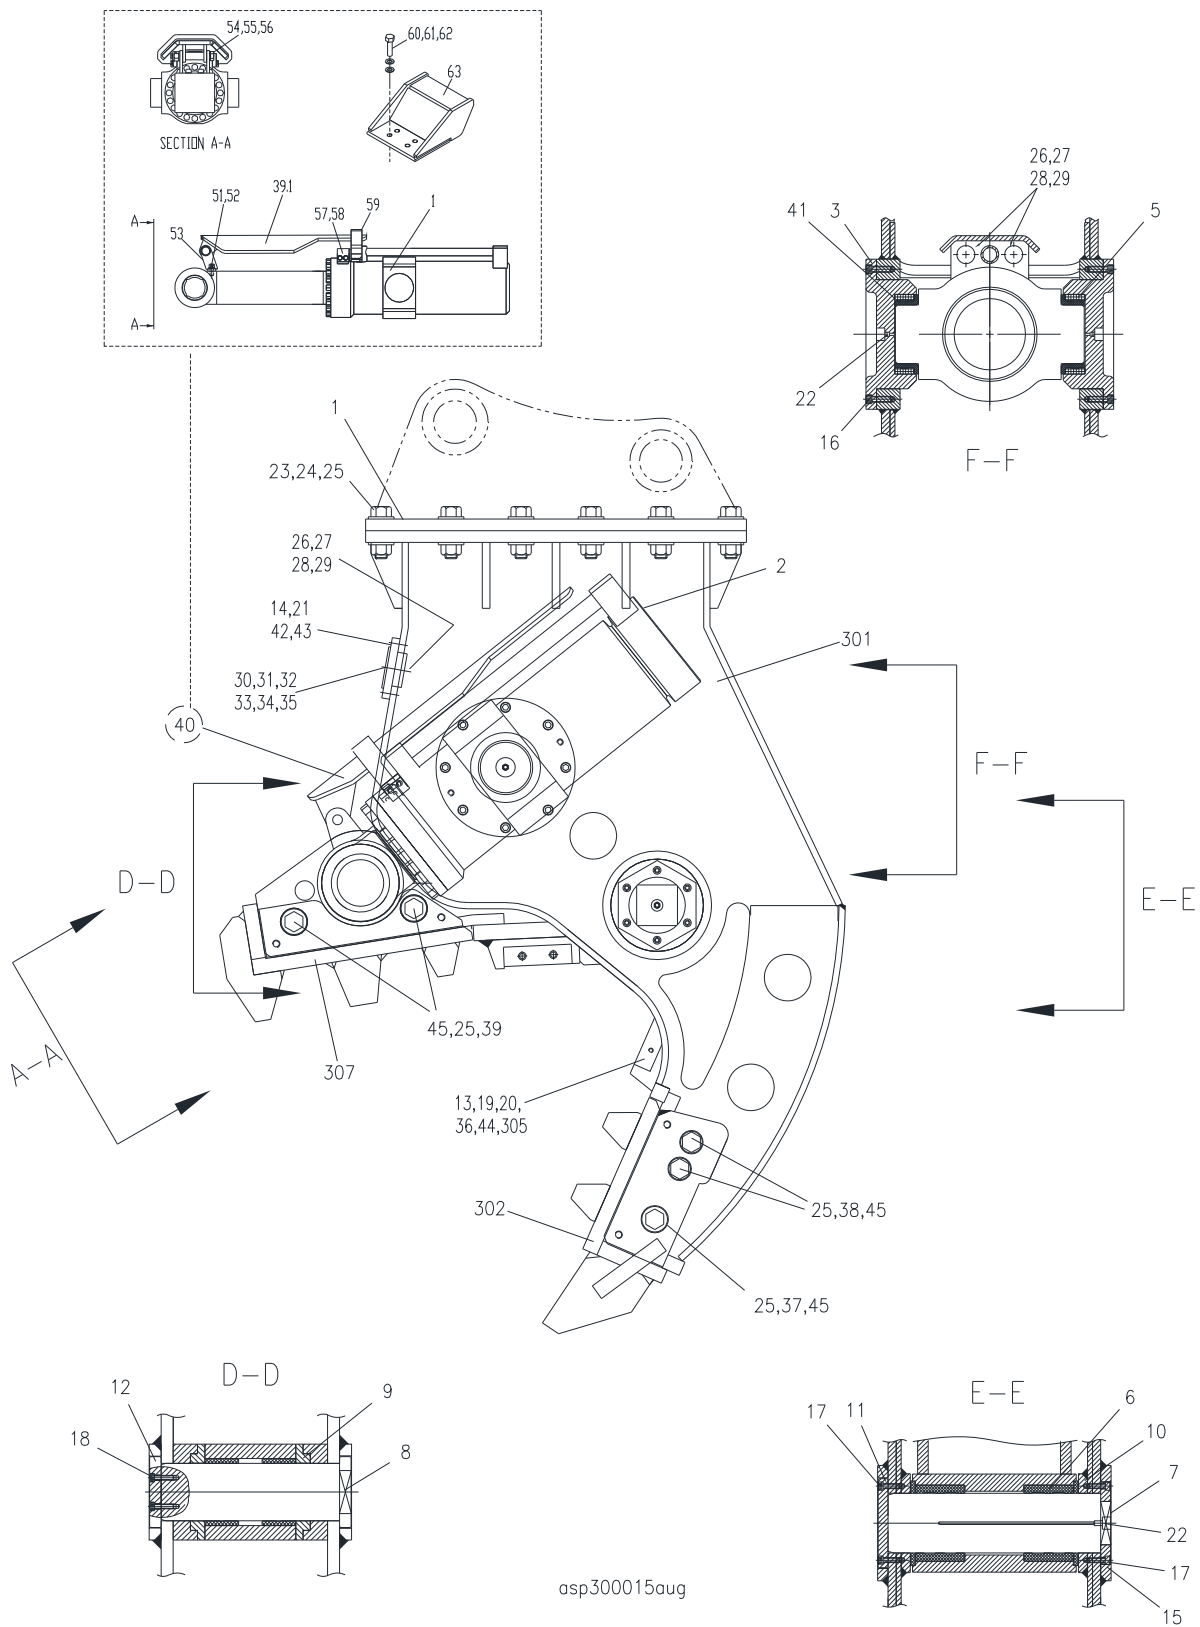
ASP3000 Assembly (Less Mounting & Hoses)
